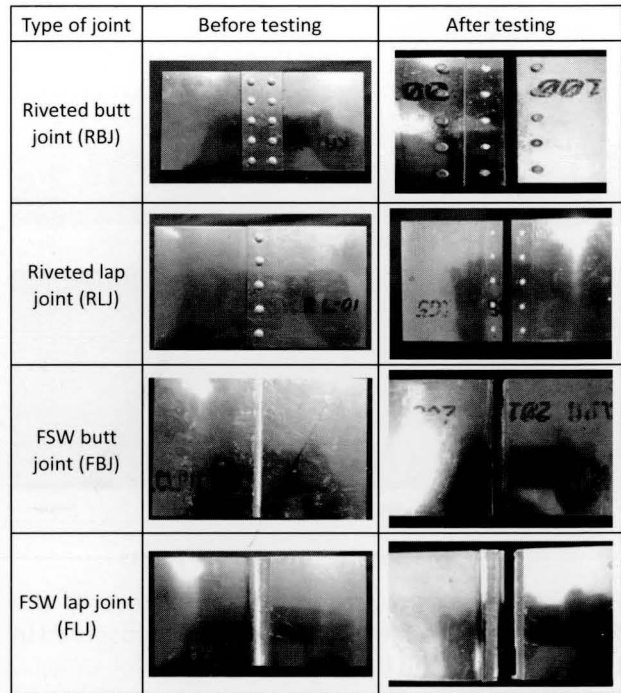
Photograph of Riveted and FSW Joints (Before and After Testing)
